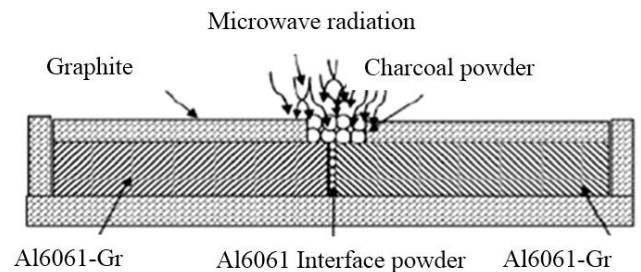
Schematic microwave welding of Al6061-Gr MMC
